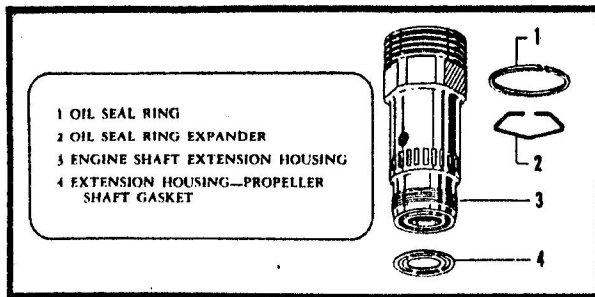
Engine Shaft Extension Assembly for Single-Acting Model 24E50
